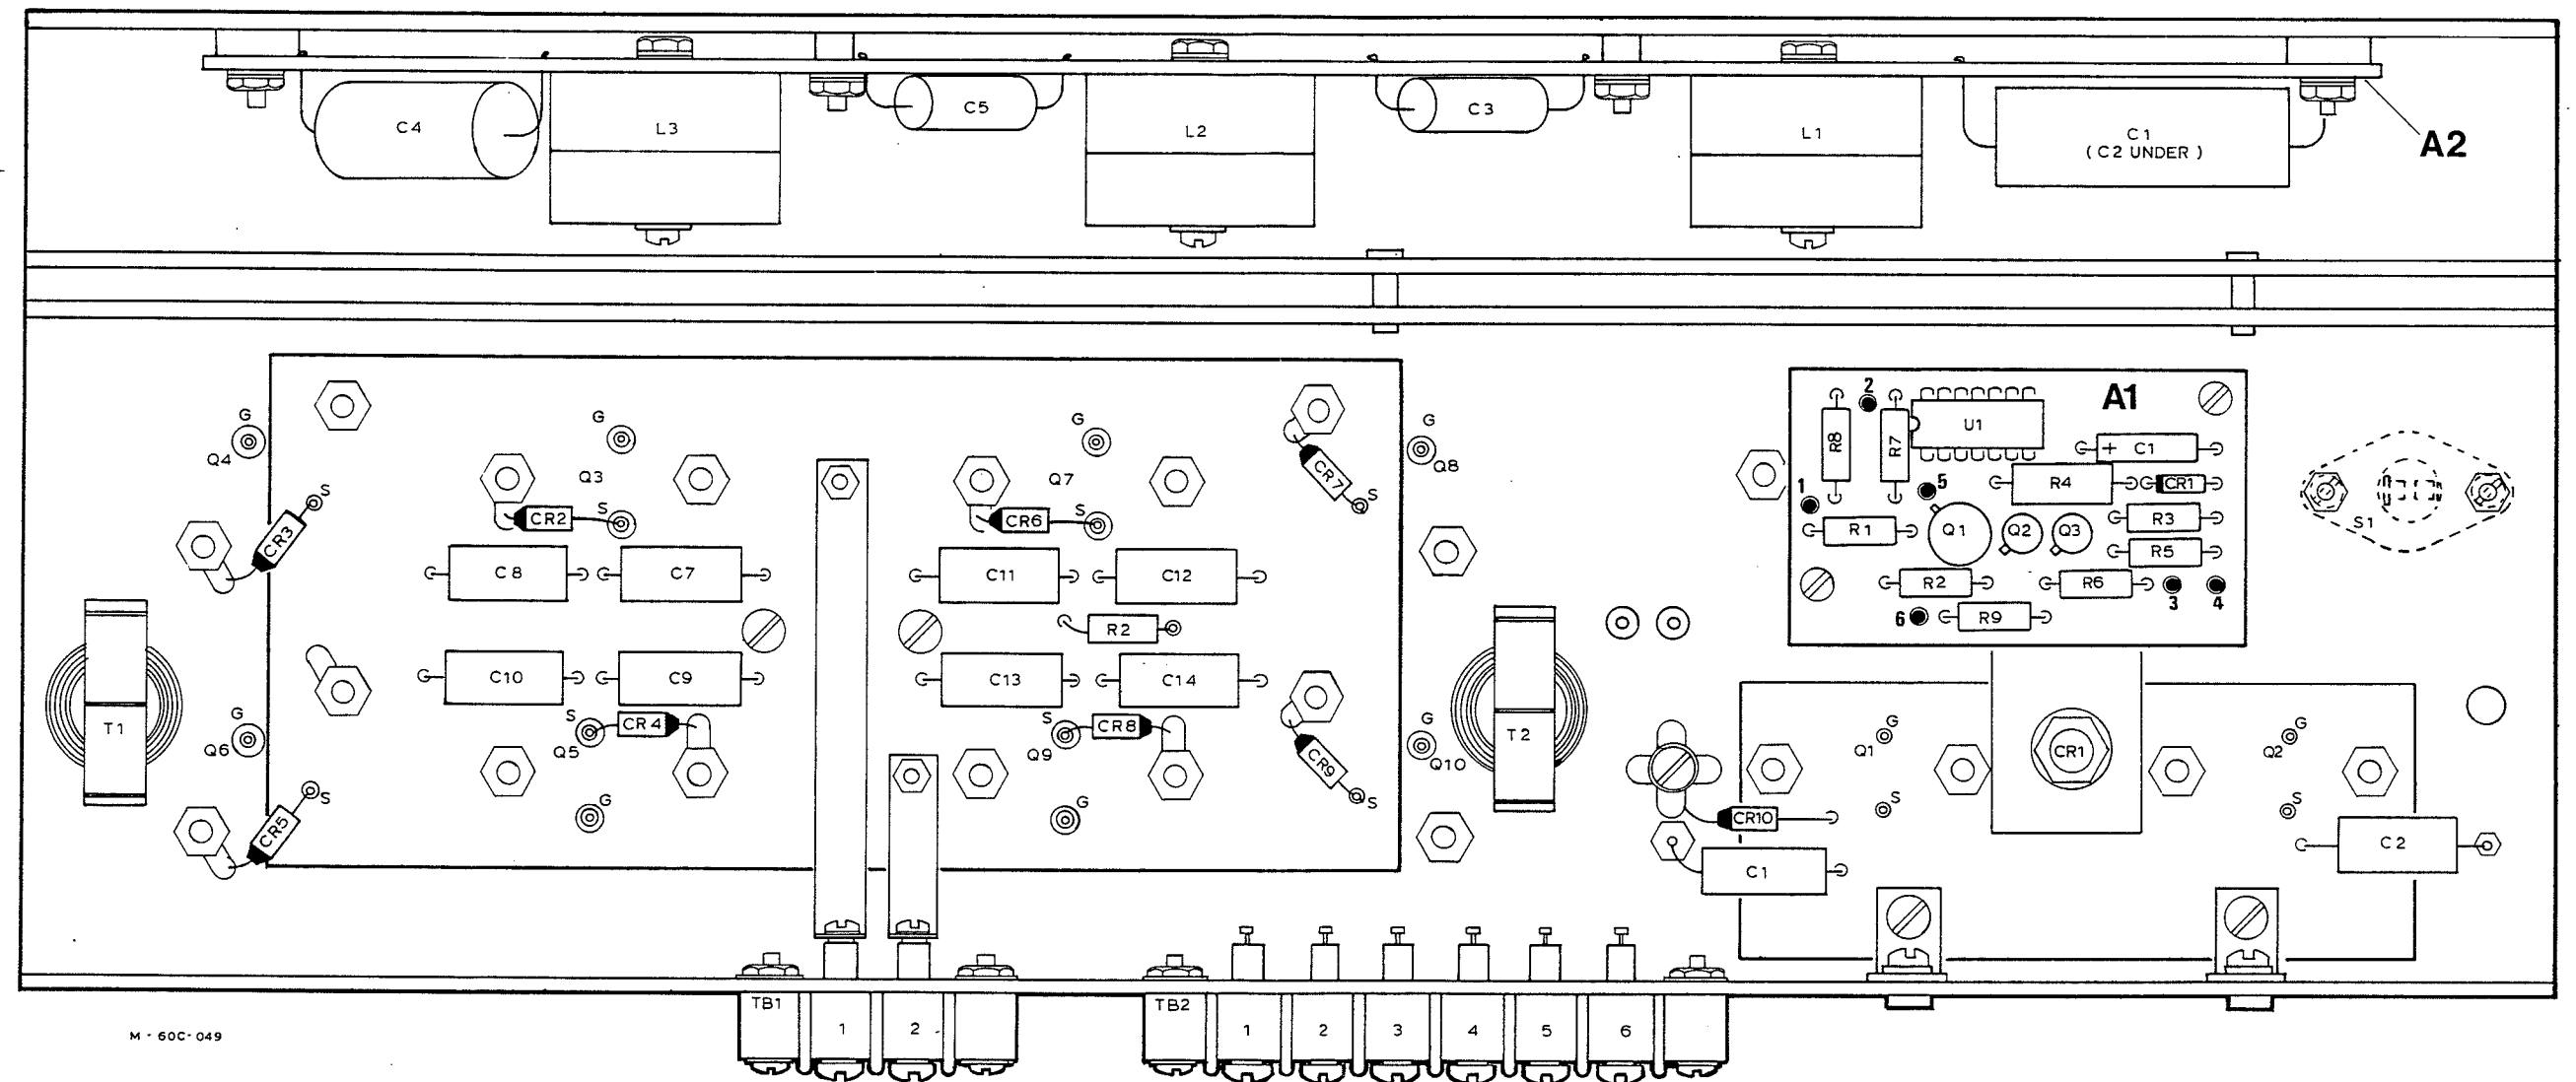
Assembly Detail - NAA13/1 Modulator/Power Amplifier Assembly (Side 1)
